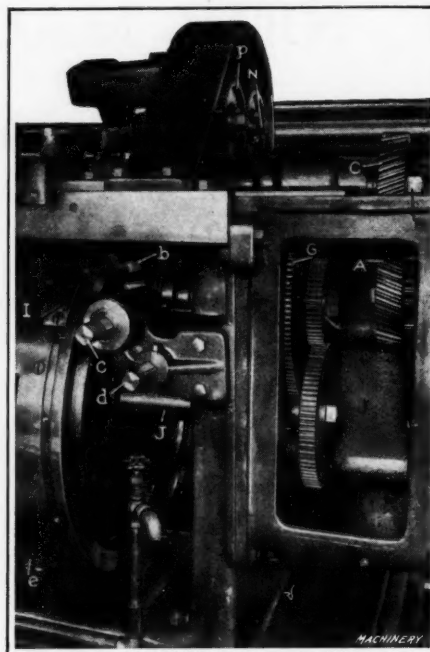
View of End of Driving Shaft with Gear Guards removed
